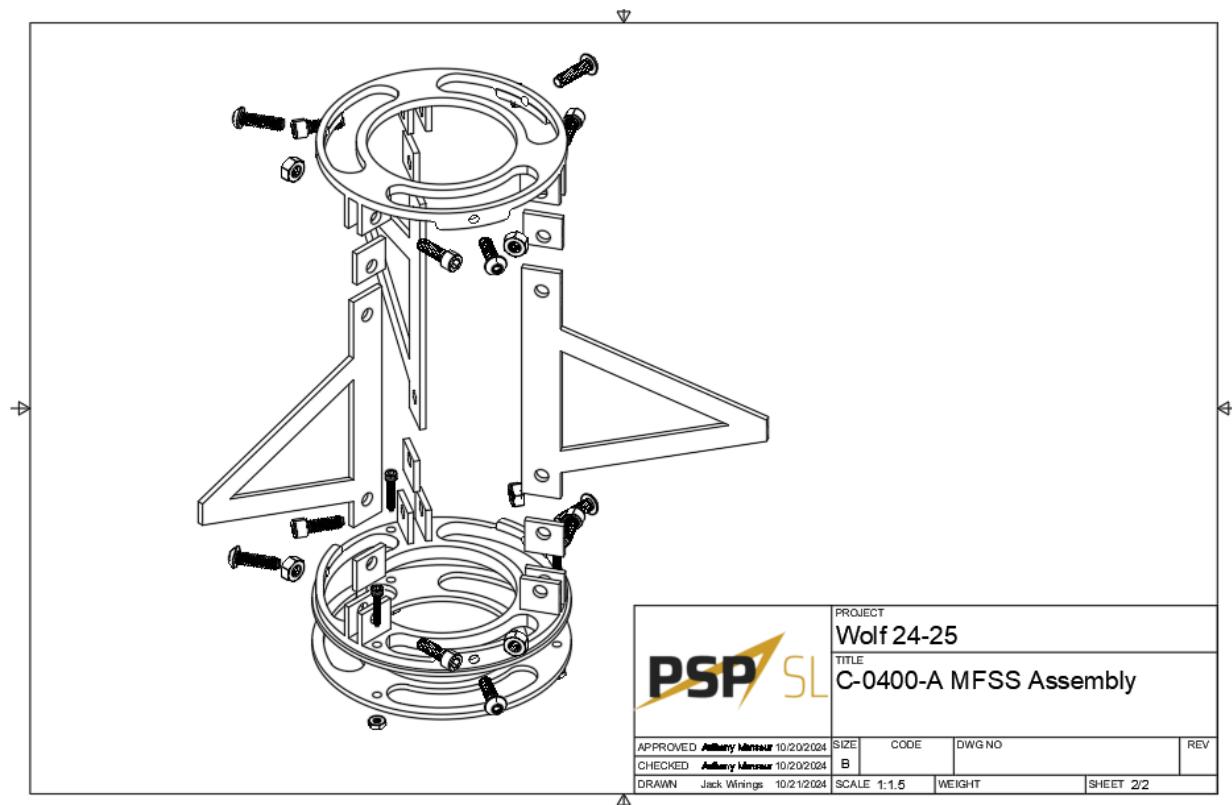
MFSS Assembly Technical Drawing (Sheet 2)
